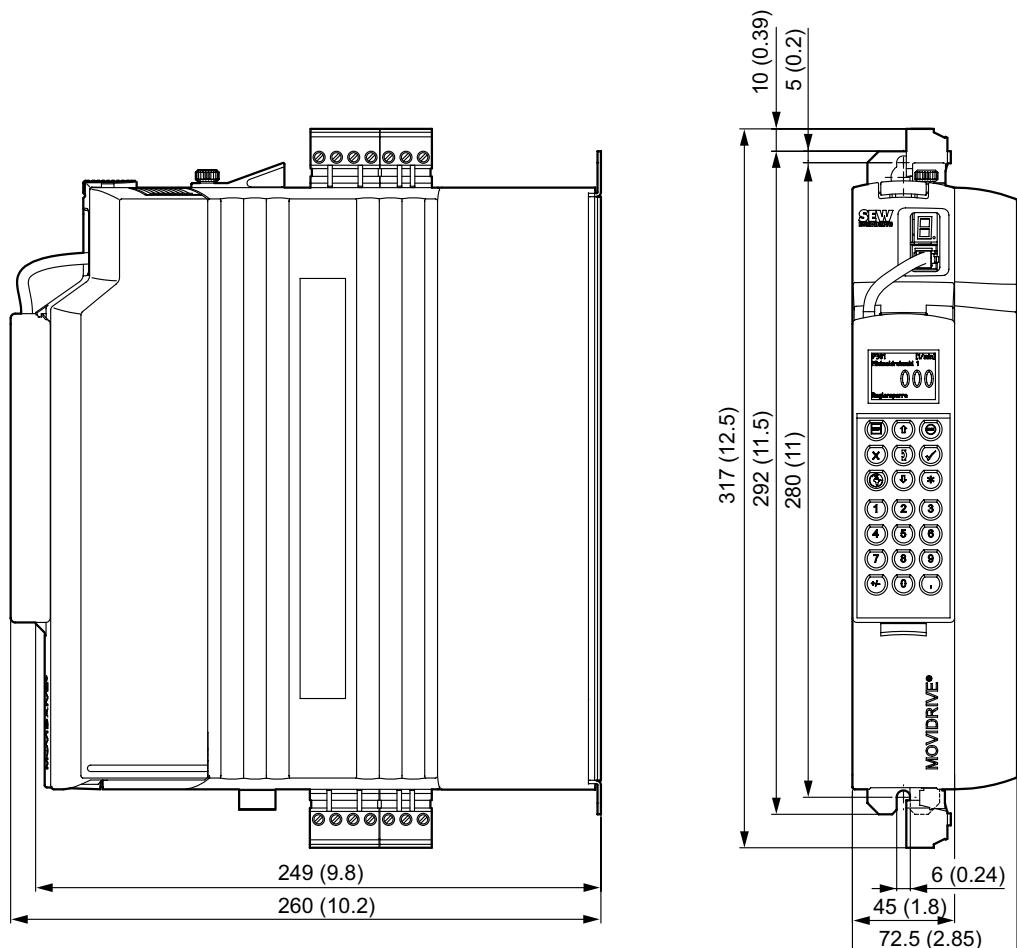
Dimensions for MDX61B size 0S, dimensions in mm (in)
